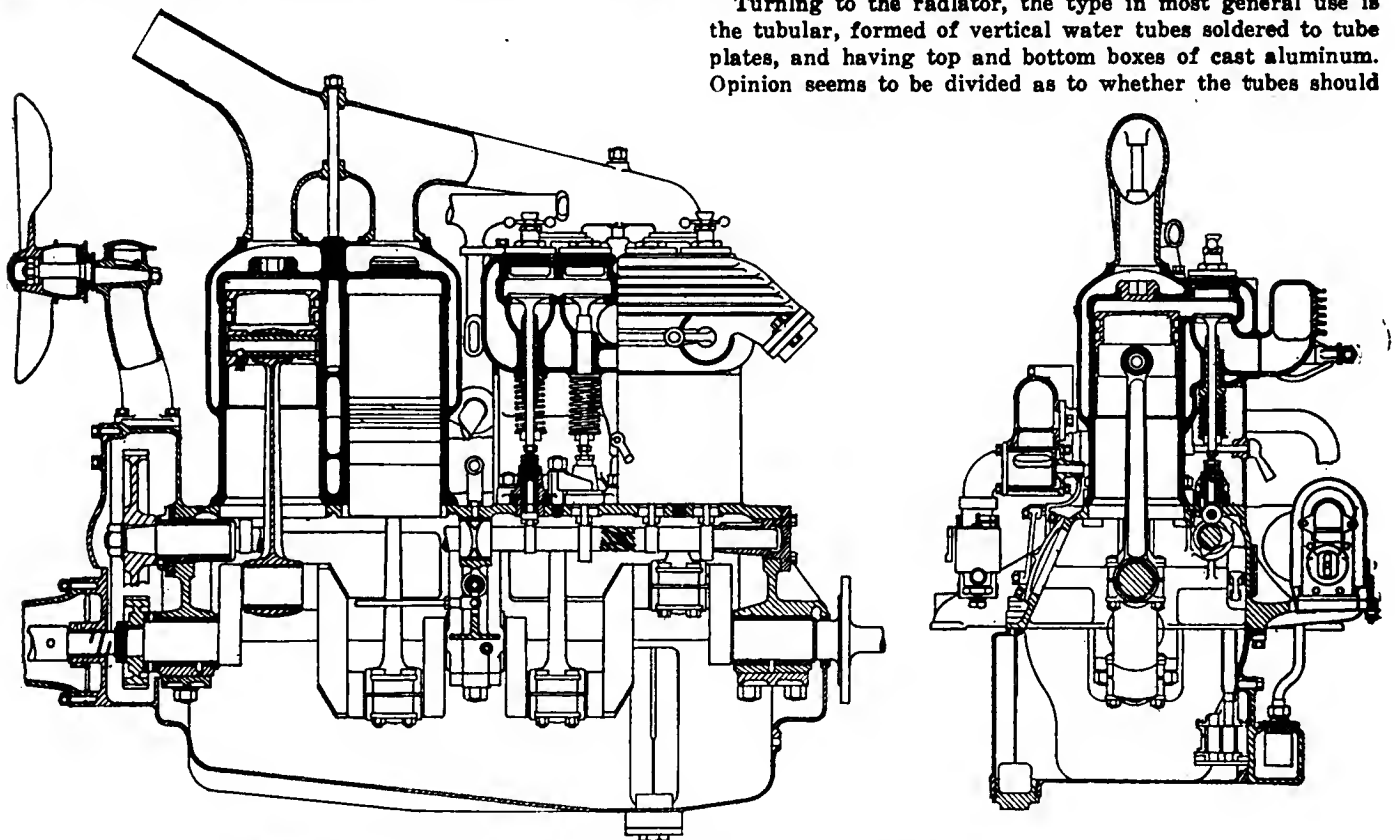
Sections of Dorman engine, army truck type. Hollow fan bracket used as oil-filler duct
